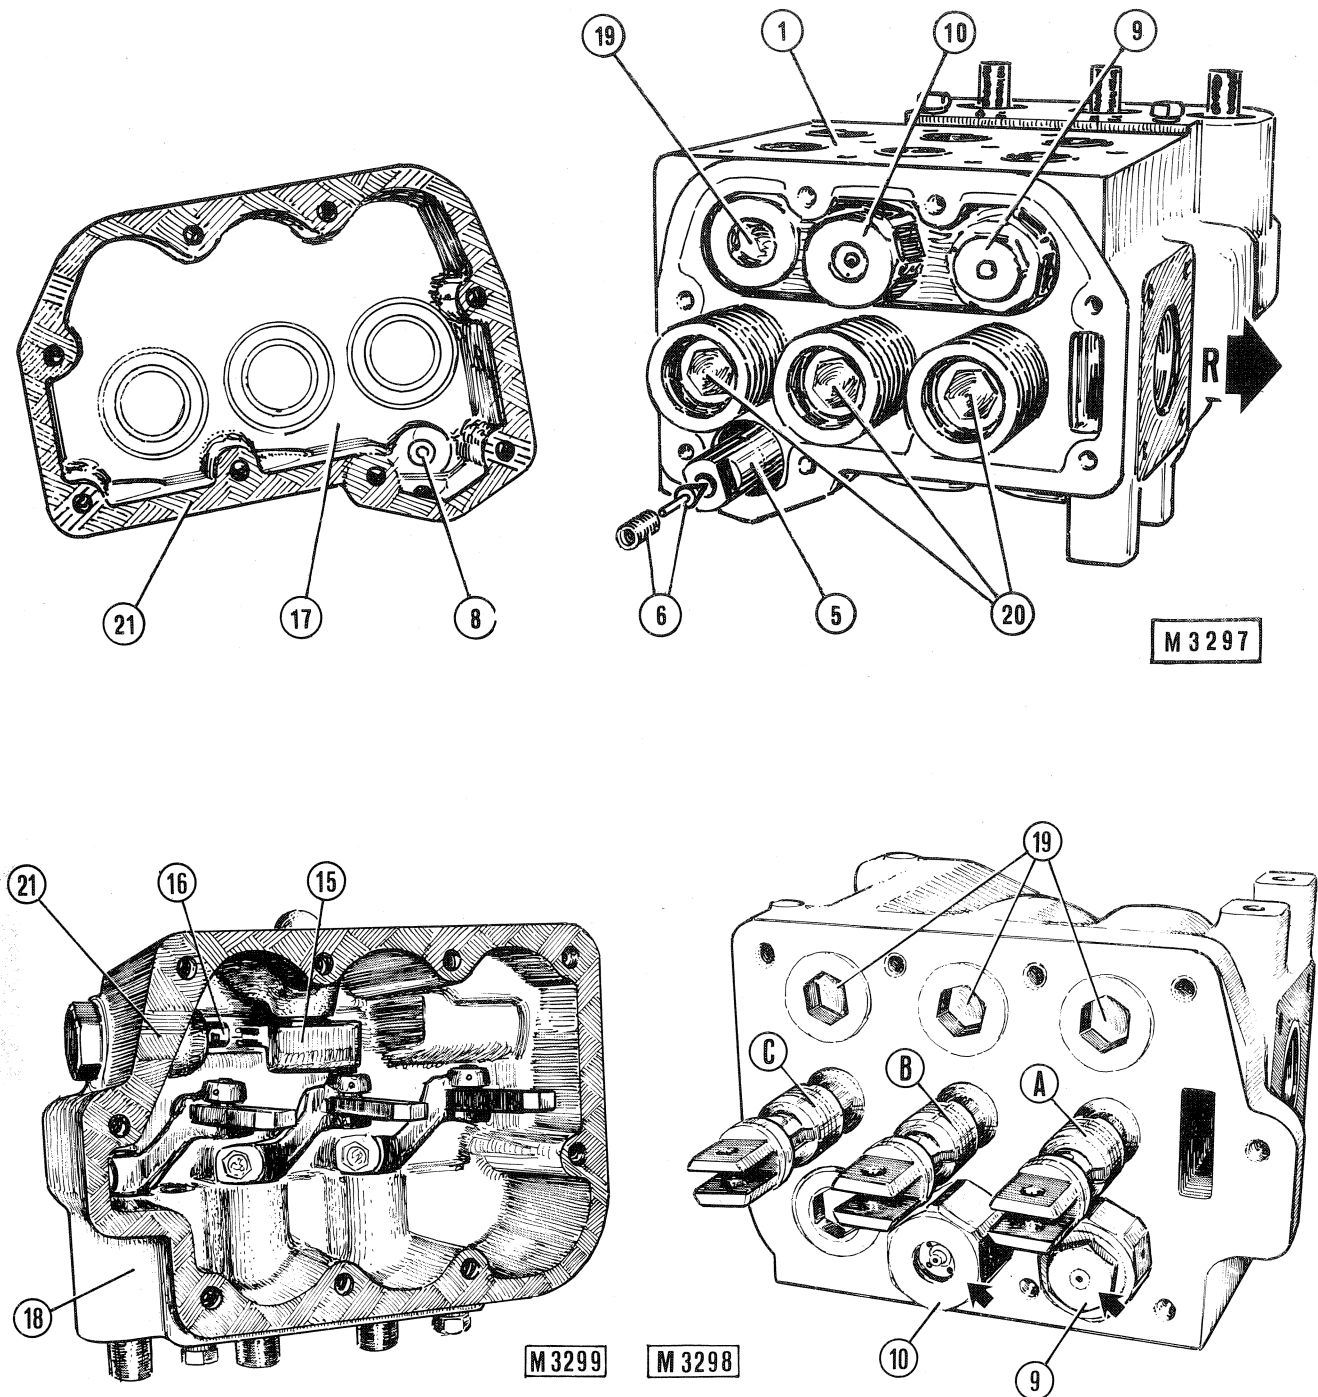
Hydraulic control valve - Exploded views and sections.
